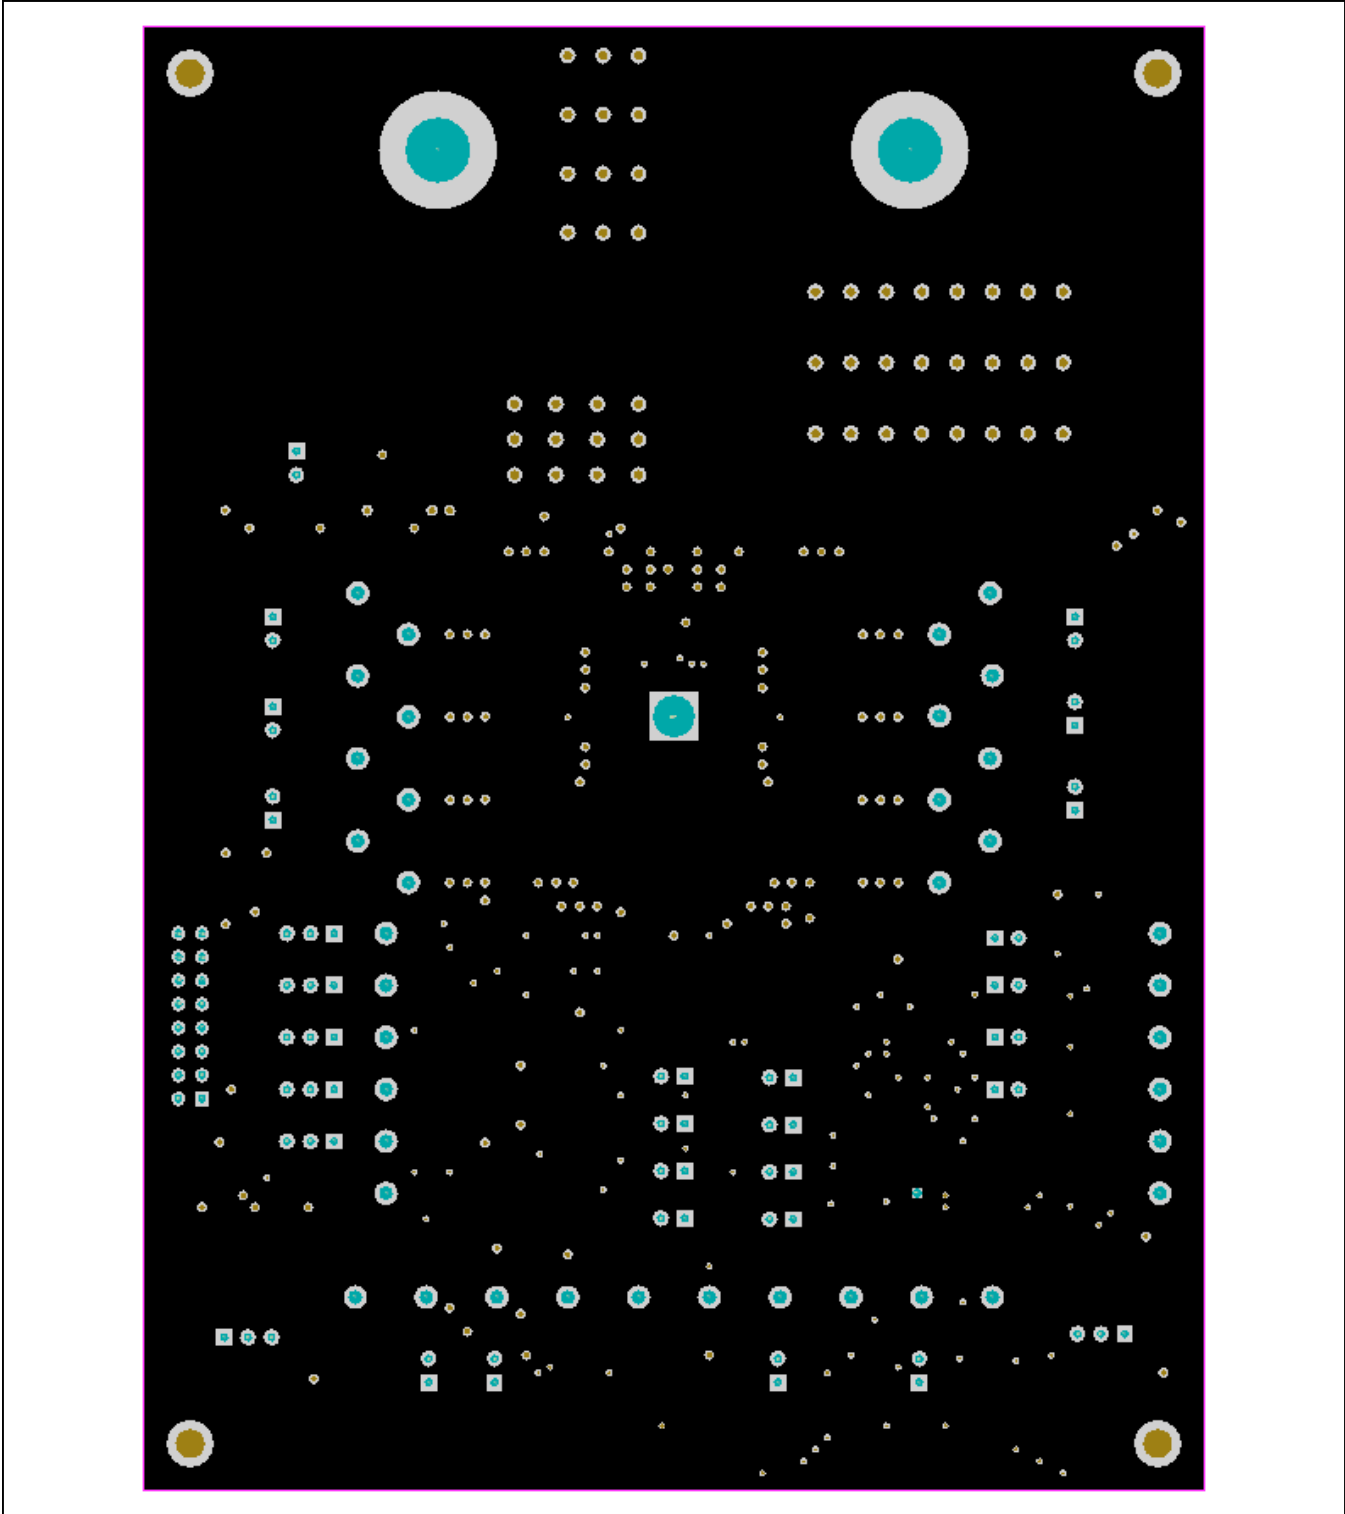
MAX14900E EV Kit PCB Layout, Internal Plane 3—V24V
